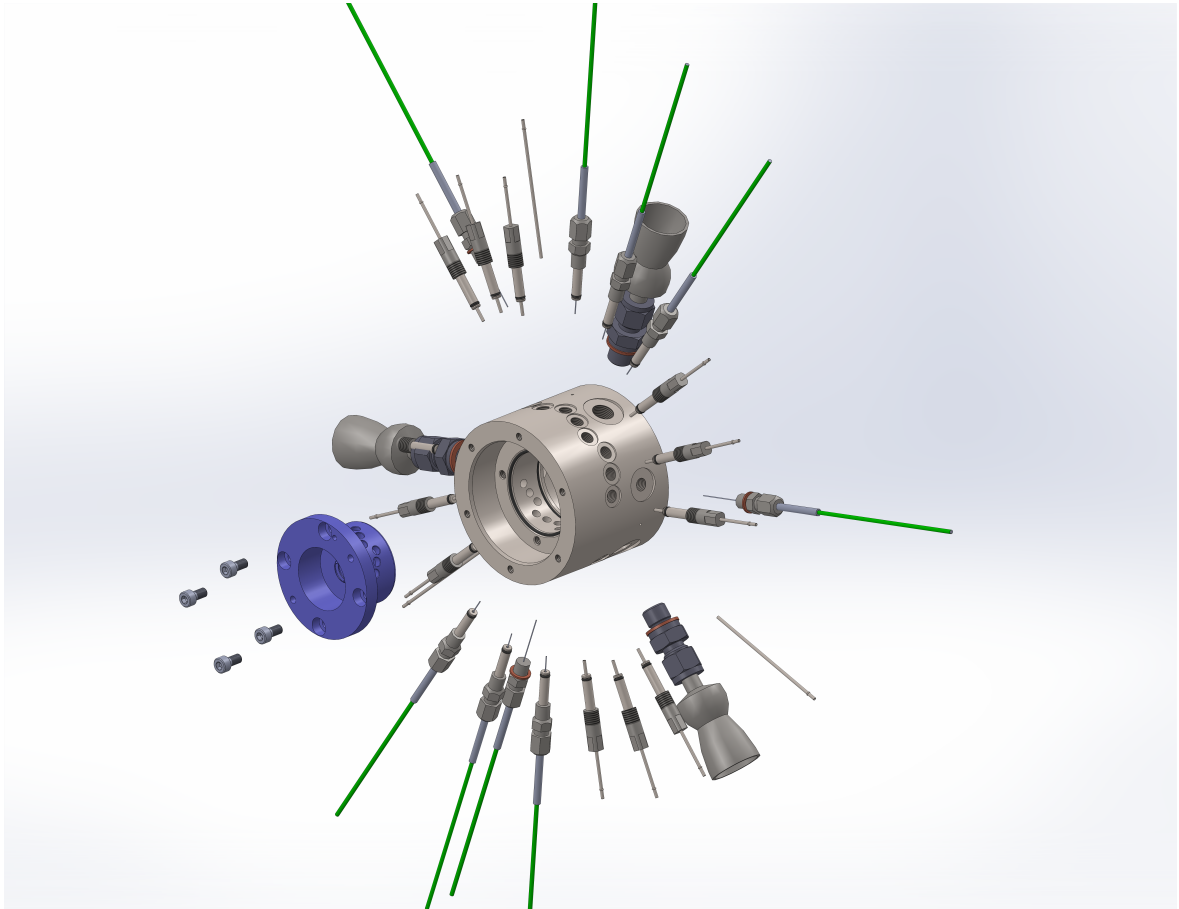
Exploded view of the seal housing showing thermocouples, custom made fittings for pressure taps and thermocouples, test seals, O-rings, and scanivalve tubings
